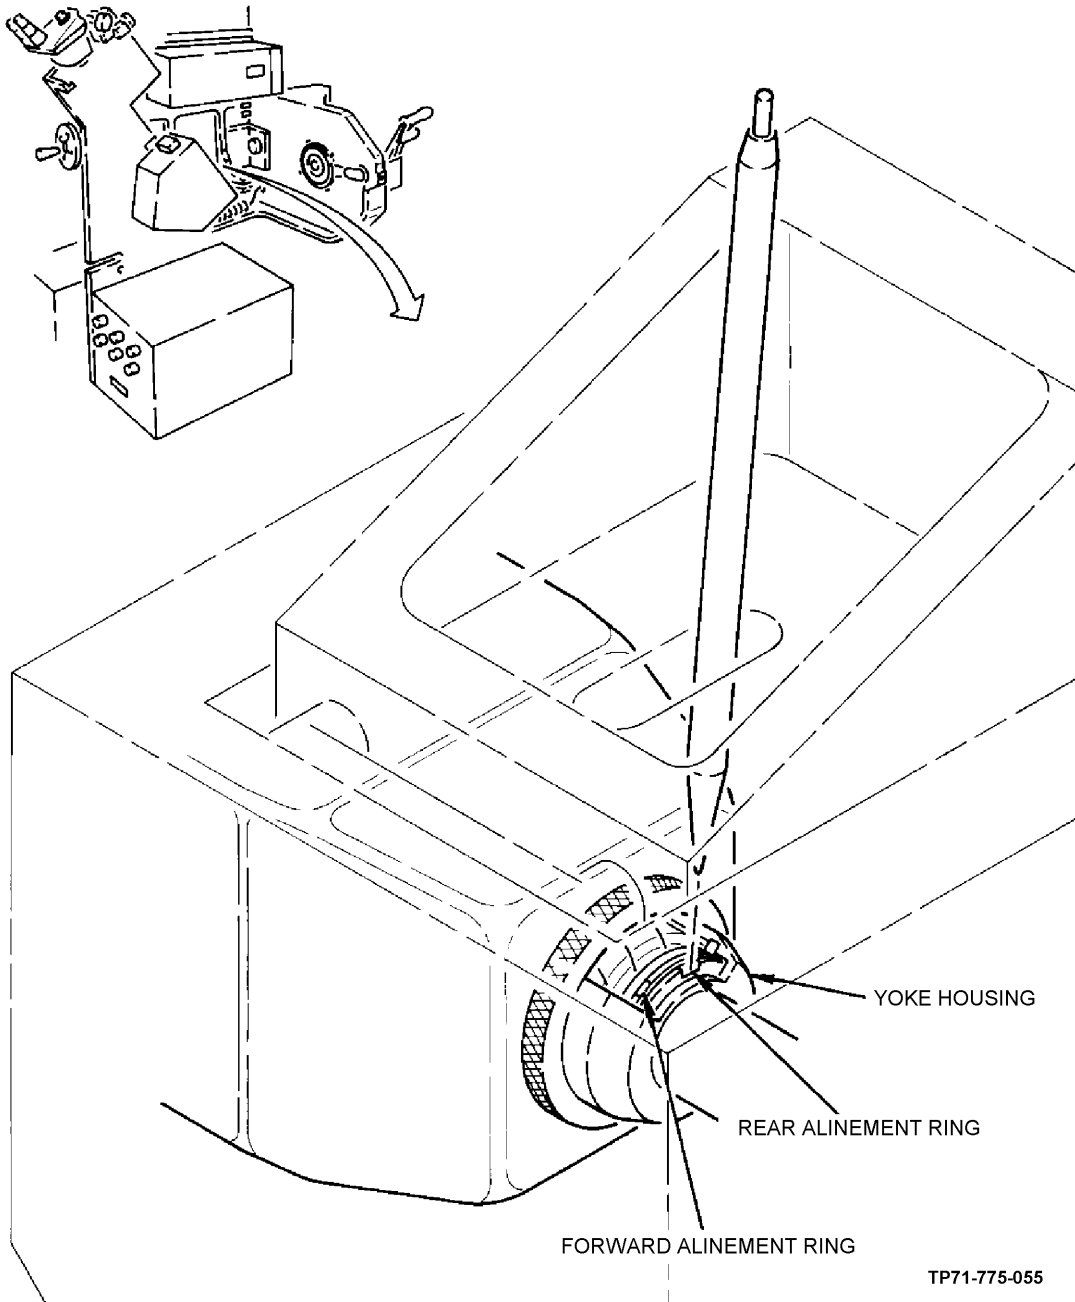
IVD Electronics Assembly Yoke Alinement Rings
